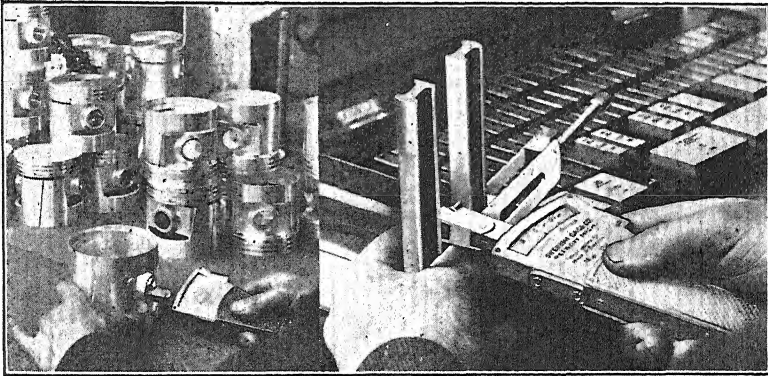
A Swedish Gage Co. No. 2 Internal Indicator Being Set Up with Johansson Gage Blocks and No. 59 Jaws Held in the No. 73 Holder.
